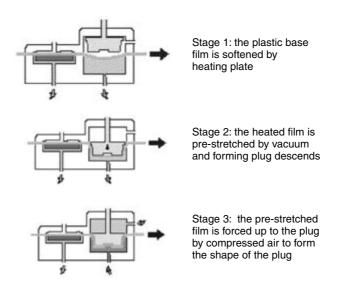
Thermoformed tray produced by plug assisted positive forming (courtesy of Multivac).
